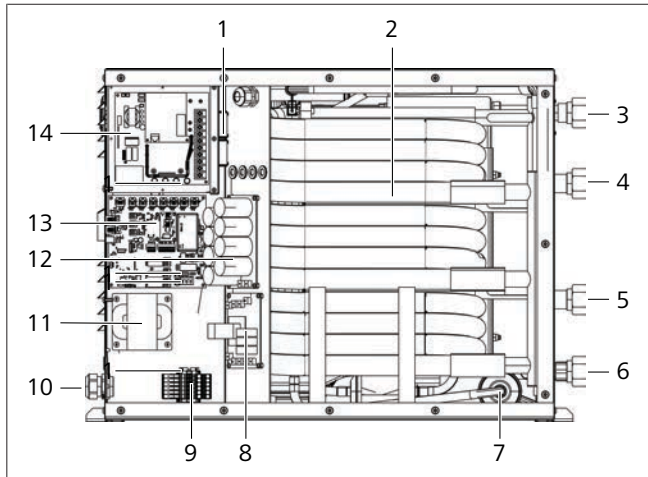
Chiller unit BlueCool V-PRO 130/180 (interior view on right)
